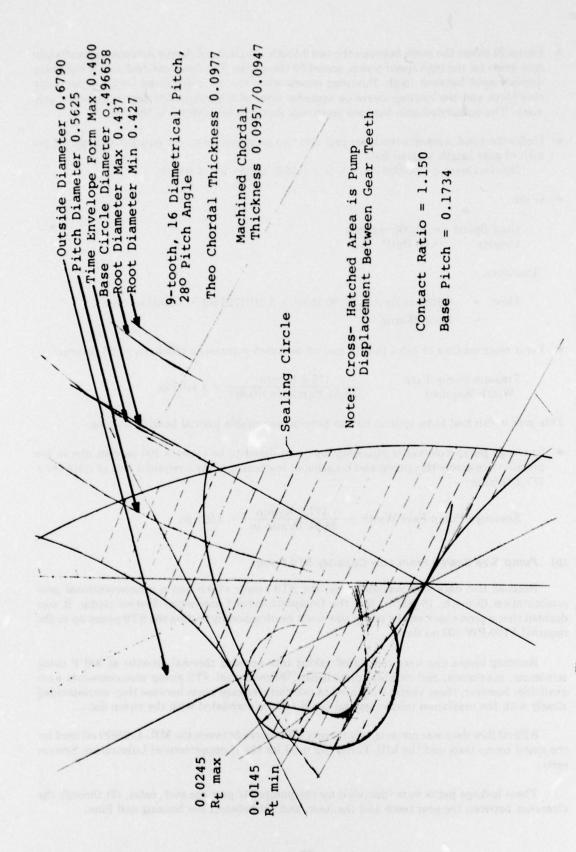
Compartmental Lubrication System Pump Gears 50 Times Size
